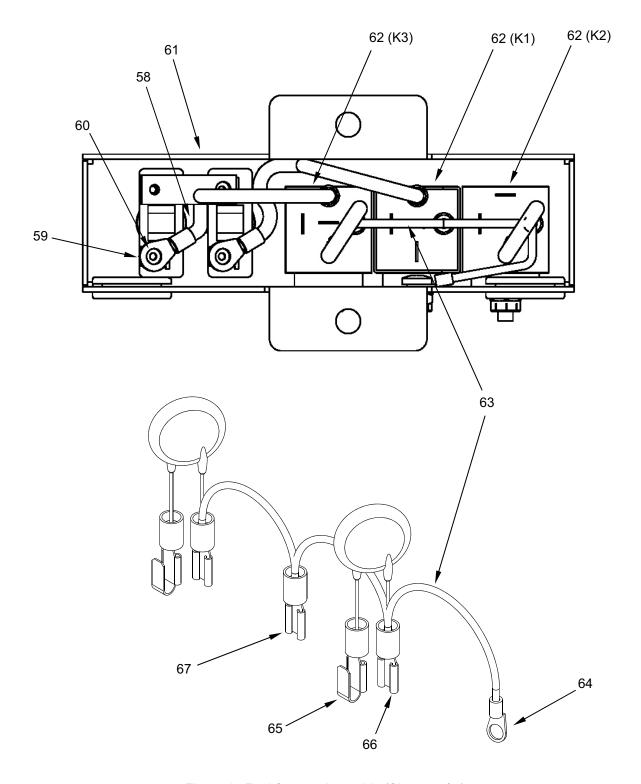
Fuel System Assembly (Sheet 5 of 5).
